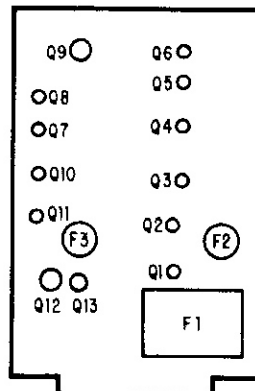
Location of Components on Circuit Board Assembly 13216
